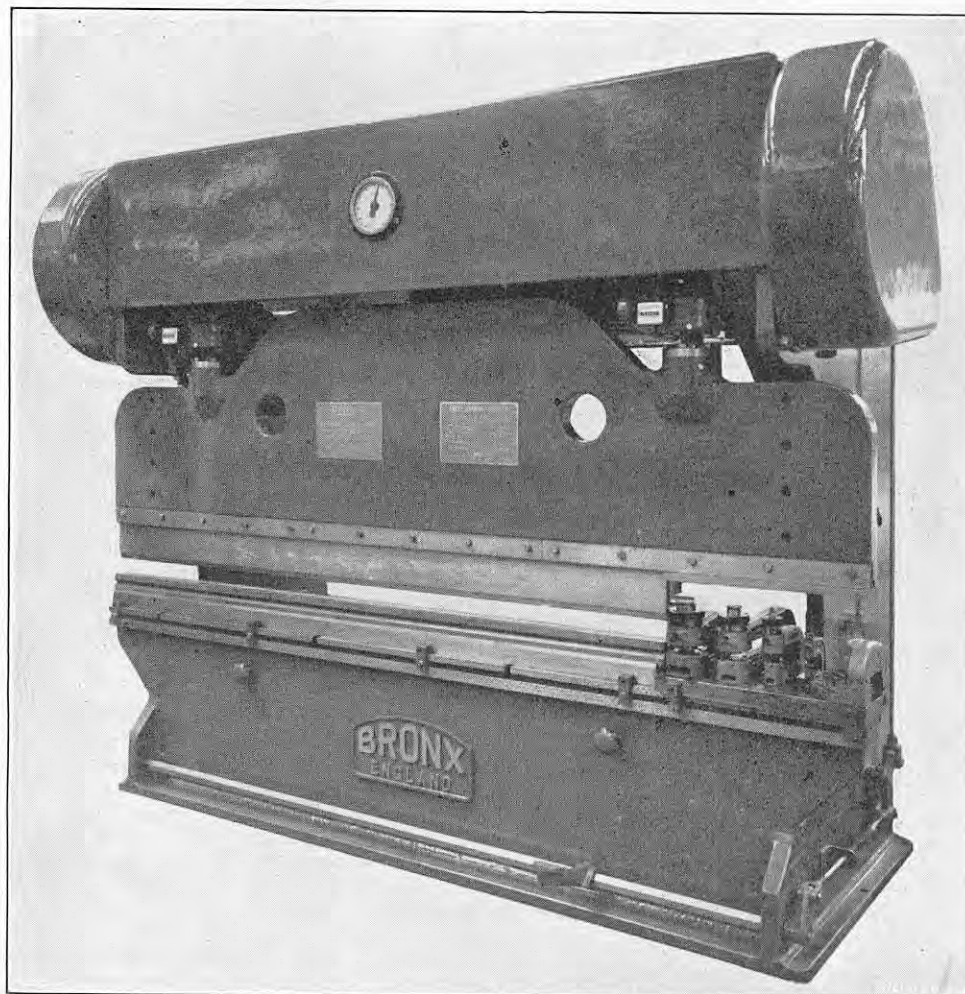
ALL-WELDED PRESS BRAKE: BRONX ENGINEERING COMPANY, LIMITED.
